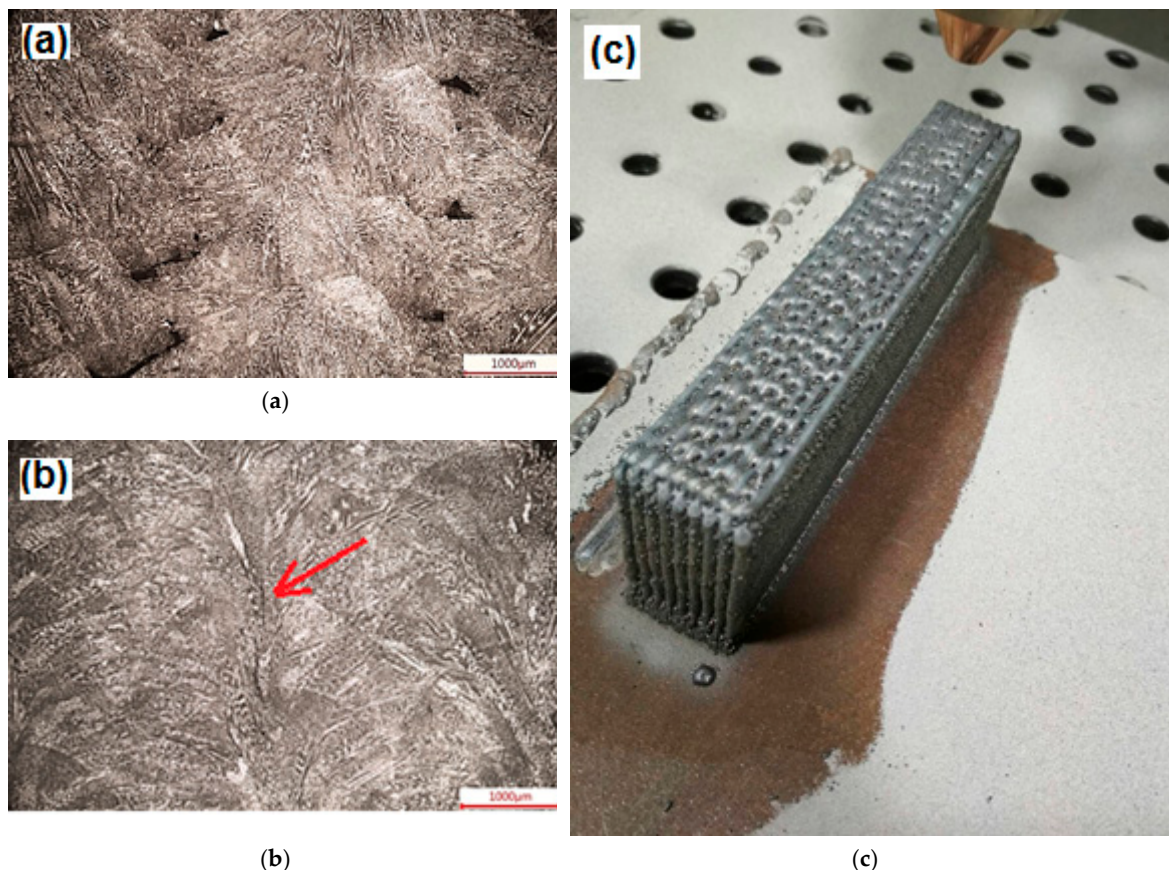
Defects in the structure of the samples that emerge because of incorrectly selected process parameters. (a) Incomplete fusions, (b) cracks, and (c) unstable formation of the cladding layers caused by a breakage of the focusing lens.
